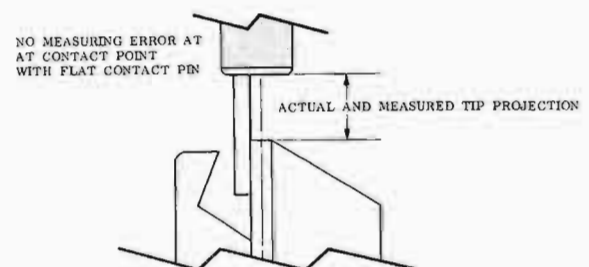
Dial indicator properly positioned, using flat contact pin.
